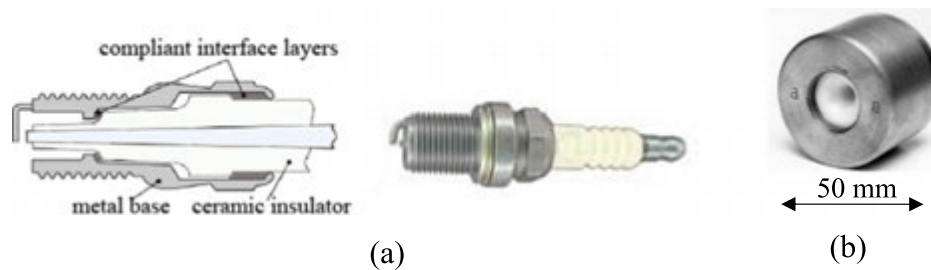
(a) Automotive spark plug and (b) a wire drawing die with a zirconia insert.
